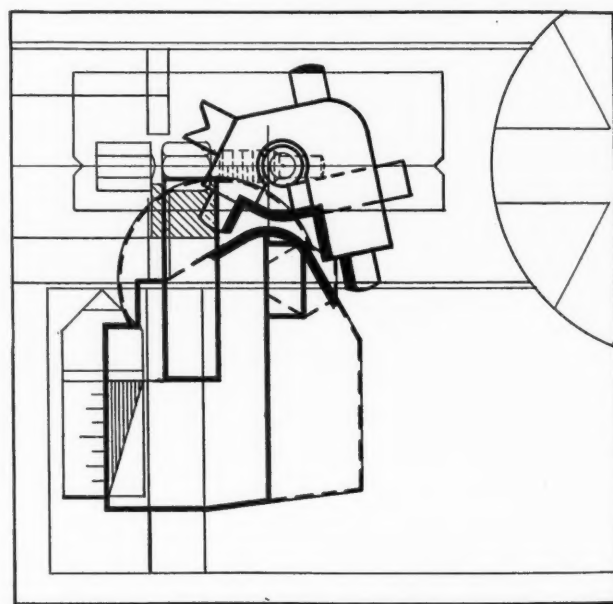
Diagram used to determine if Forming Tool and Box-tool interfere
